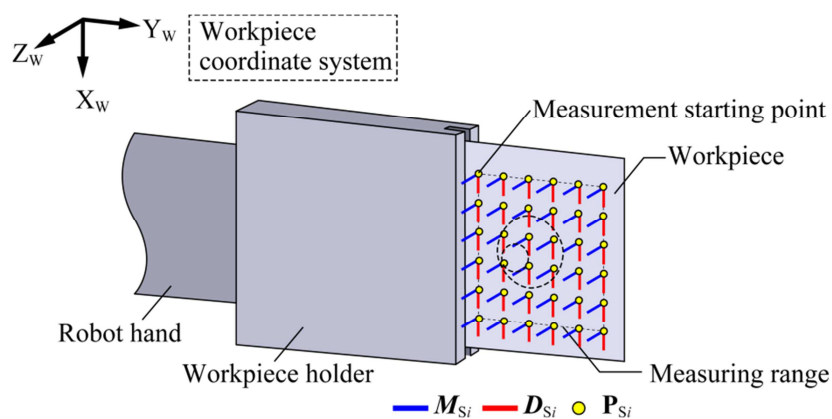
Shape measurement path based on workpiece coordinate system
